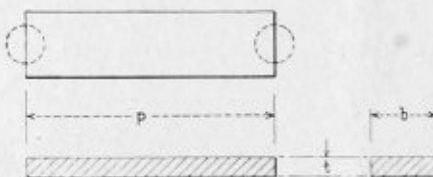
Assumed Section of Plate Through Maximum Pitch of Stays
